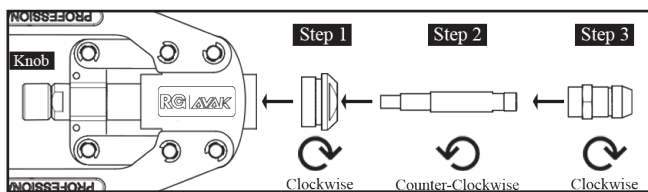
Installing accessories for fastening rivet nut or rivet stud
